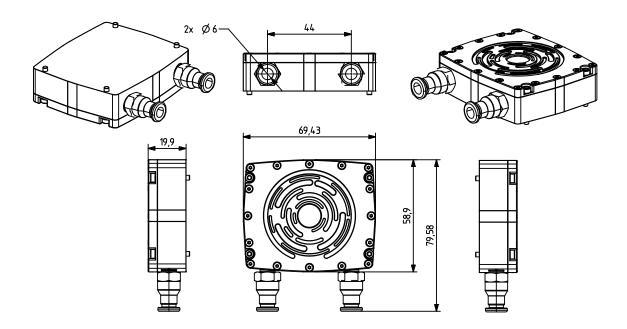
Dimensional drawing of CB-X8G3-WAT-COOLER-KIT
